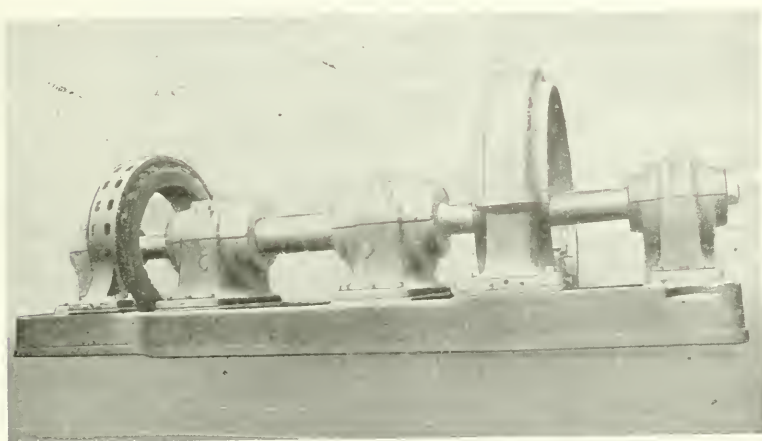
EQUALIZER SET PARTIALLY ASSEMBLED SHOWING BED PLATE, SHAFT, BEARINGS AND MOTOR AND GENERATOR FRAMES
